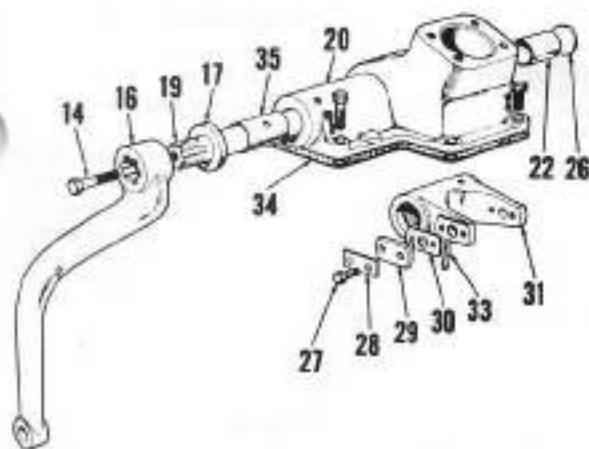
Exploded view of model 770 steering gear housing, cross shaft and steering (drop) arm. Shims (30) are provided to adjust ball nut peg (29) preload against ball nut.
